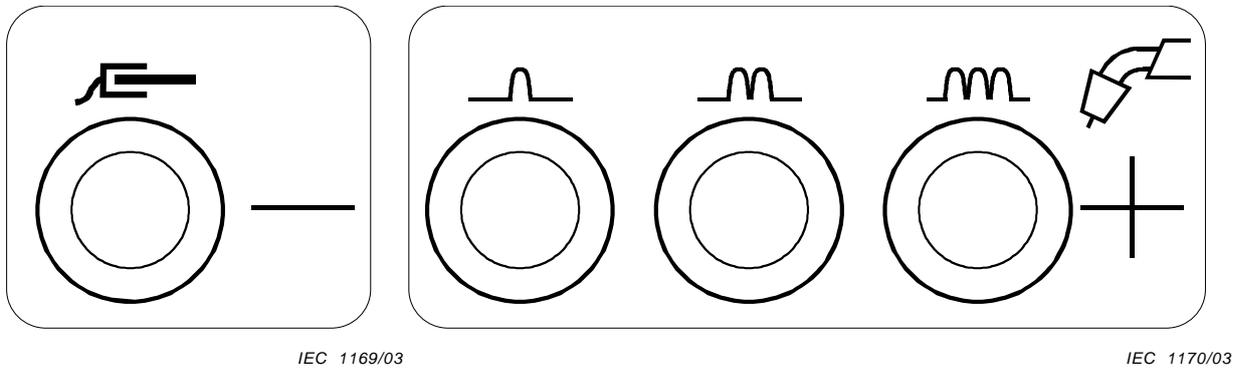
Terminals with inductance selector for MIG/MAG welding
